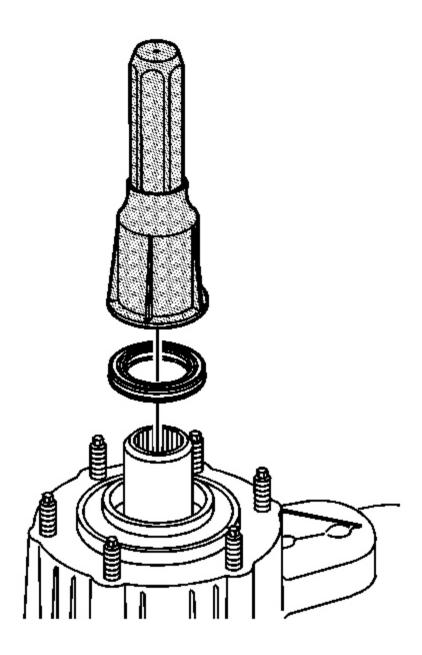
Installing The Front Input Shaft Seal J 42738 Courtesy of GENERAL MOTORS CORP.
